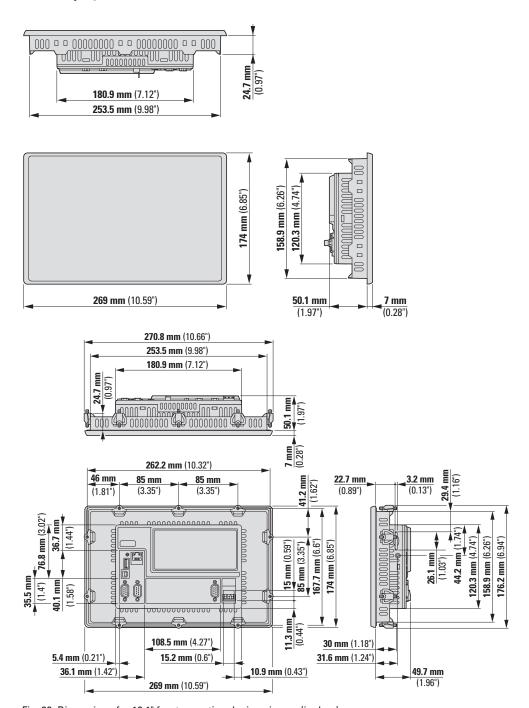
Dimensions for 10.1" front mounting devices in mm (inches)
